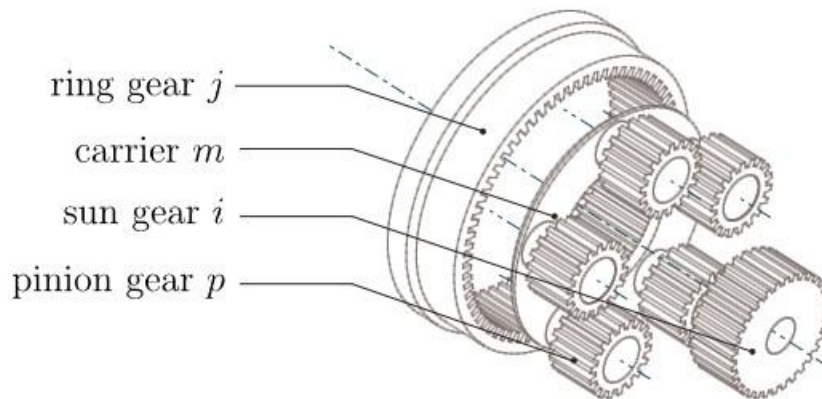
planetary gearbox with ring, sun, pinion gear and carrier
